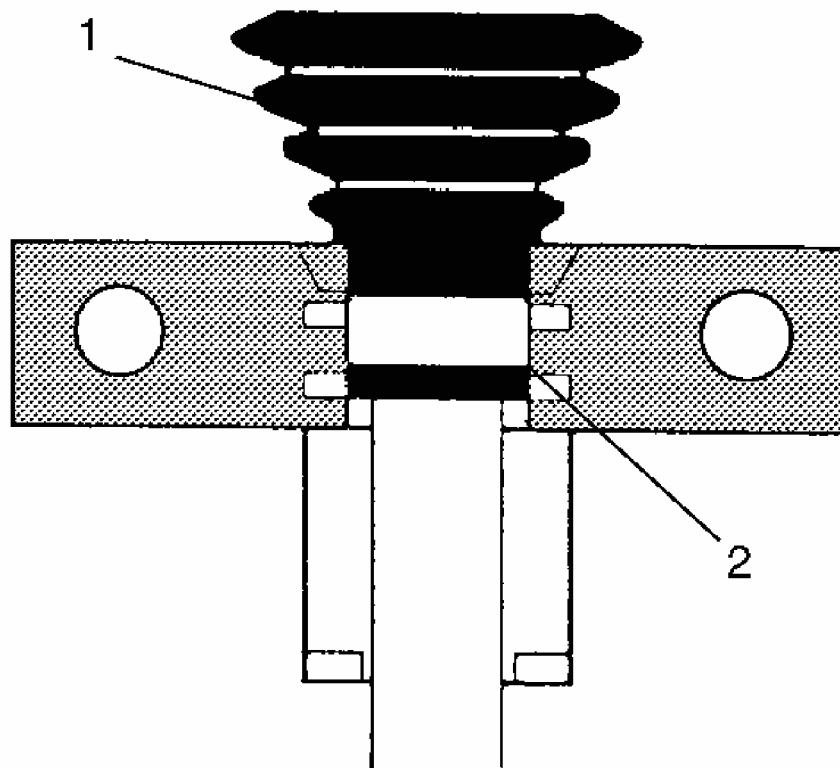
Identifying Halfshaft Inboard Seal & Swage Ring
